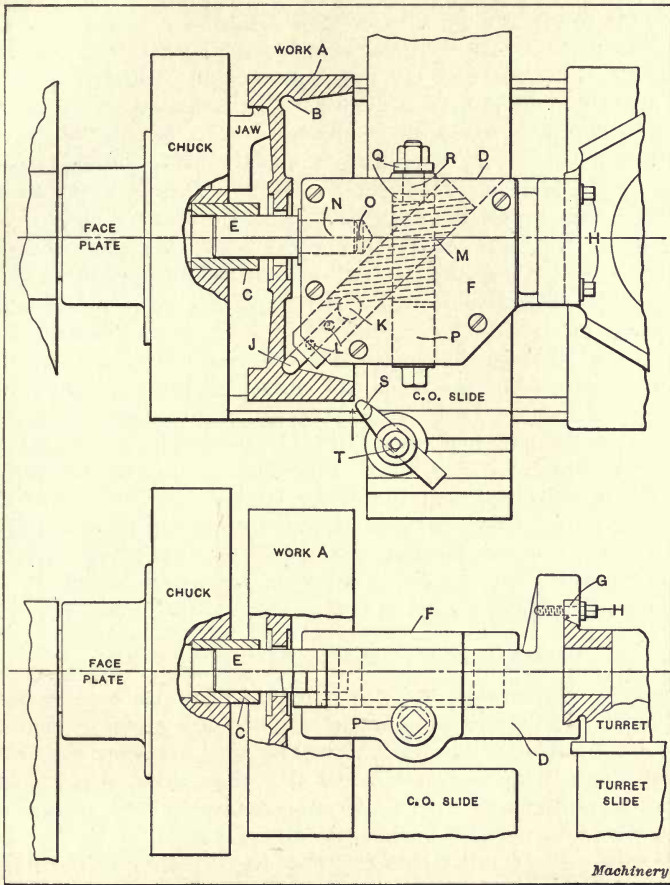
A Recessing Tool used in machining an Automobile Flywheel
